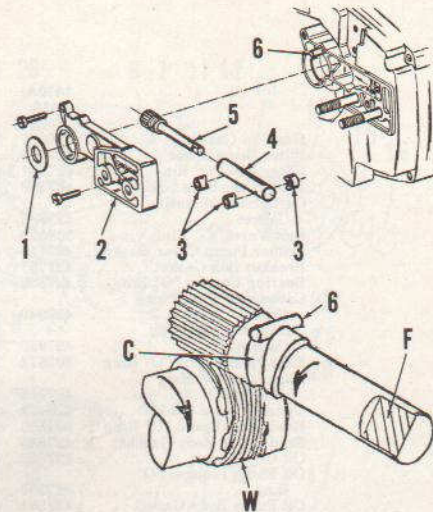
View of the chain oiler pump. The worm (W) is part of the engine crankshaft. Refer to text.
